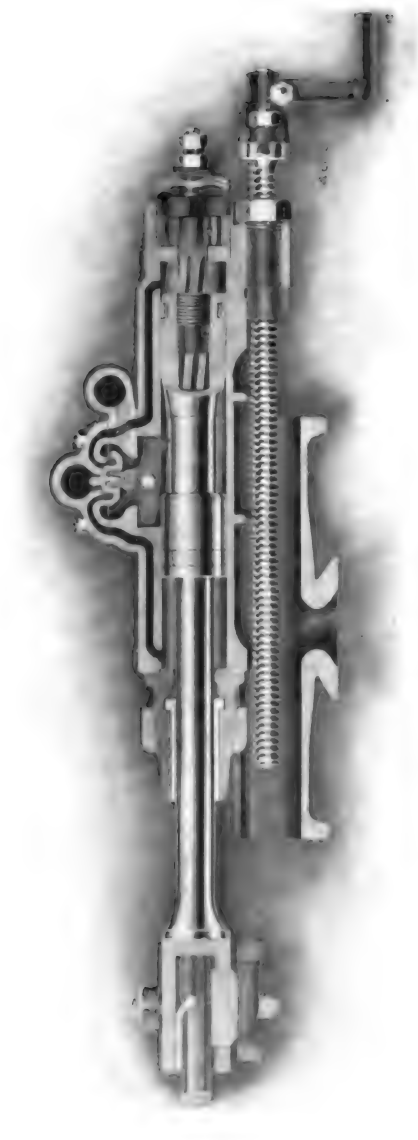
Ingersoll-Rand "Arc-Valve" Tappet Drill.
